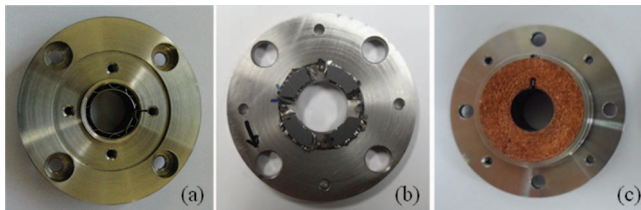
(a) Radial air foil bearing. (b) Thrust air foil bearing. (c) Radial metal mesh foil bearing.
